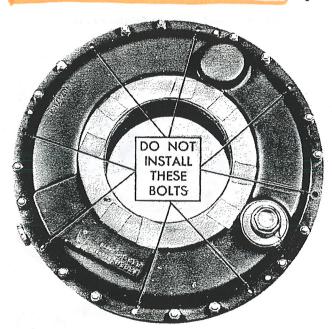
Install Regulator Cover Bolts, Which Do Not Retain Bulkhead
